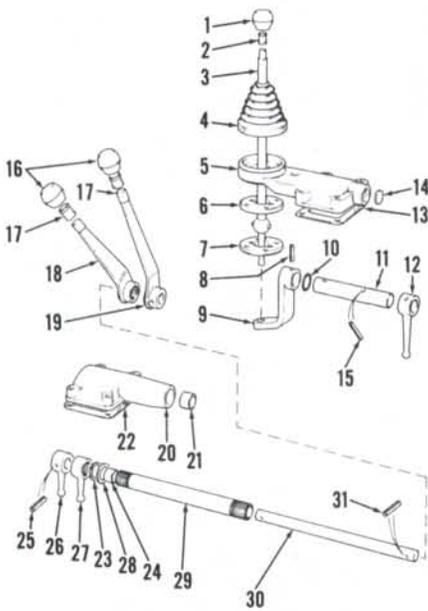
Exploded view of range and transmission shift selector levers for tractors without cabs equipped with synchromesh transmission. Models with cabs are similar.
